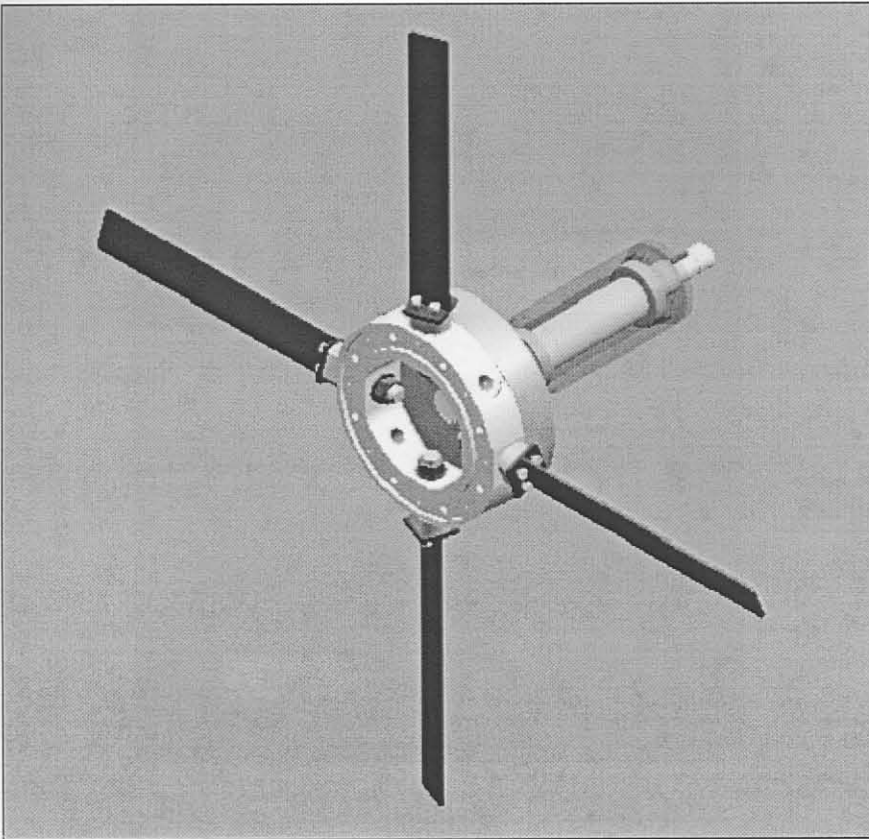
FaBCoM TeSt Rotor Assembly Isometric Drawing
